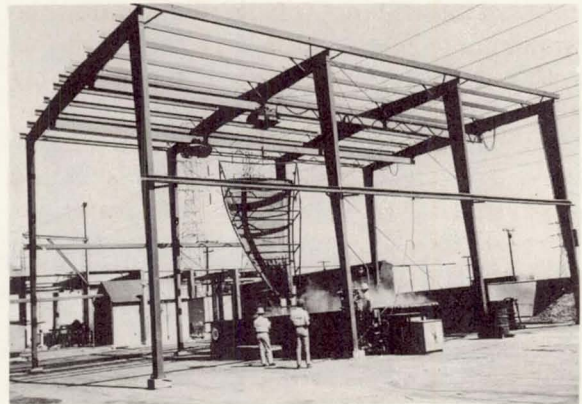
Large bulkheads. Chemical milling. (Courtesy Chemical Contour Corp.)
